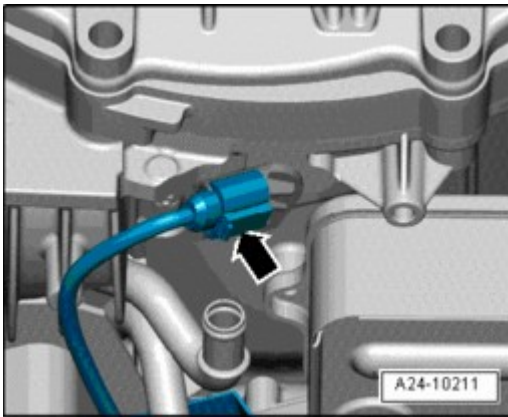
Disconnecting Electrical Connector On Engine Speed (RPM) Sensor G28
